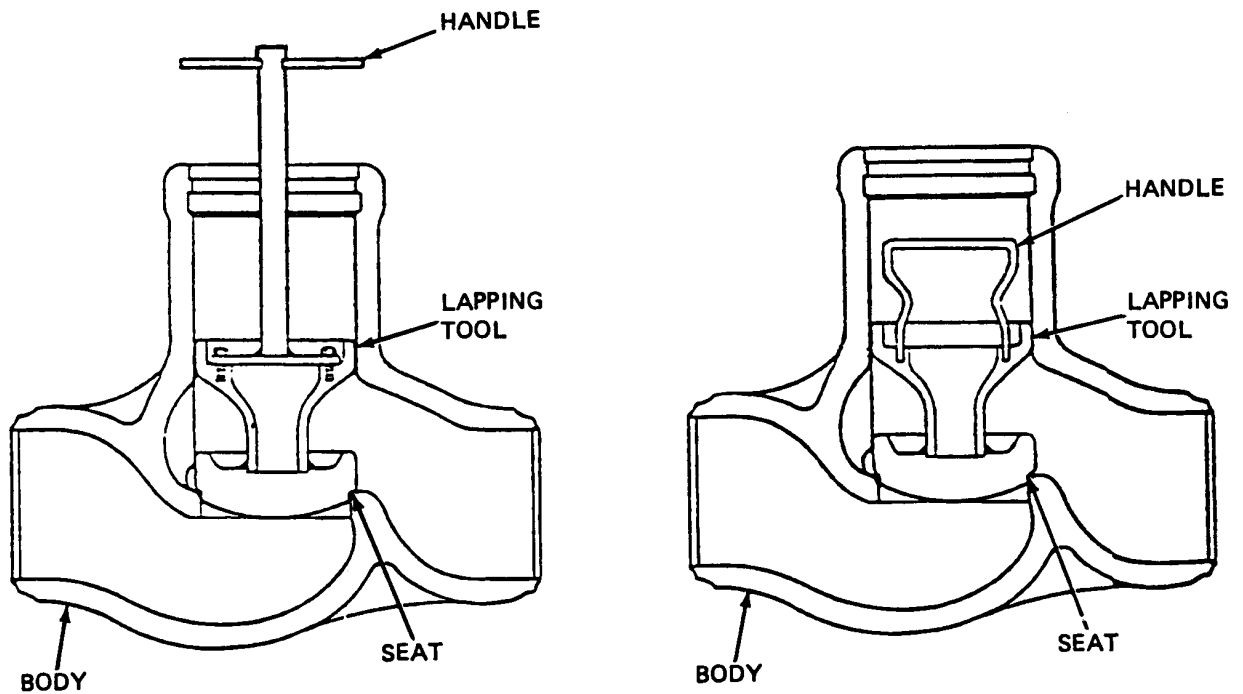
Lapping Globe Valves Using Lapping Tool
